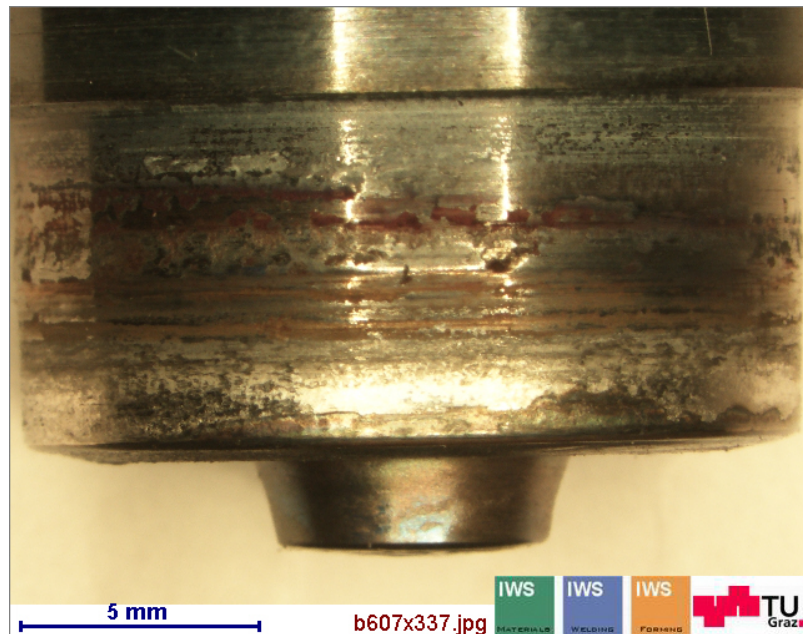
W25Re tool profile after 2250 mm welding
